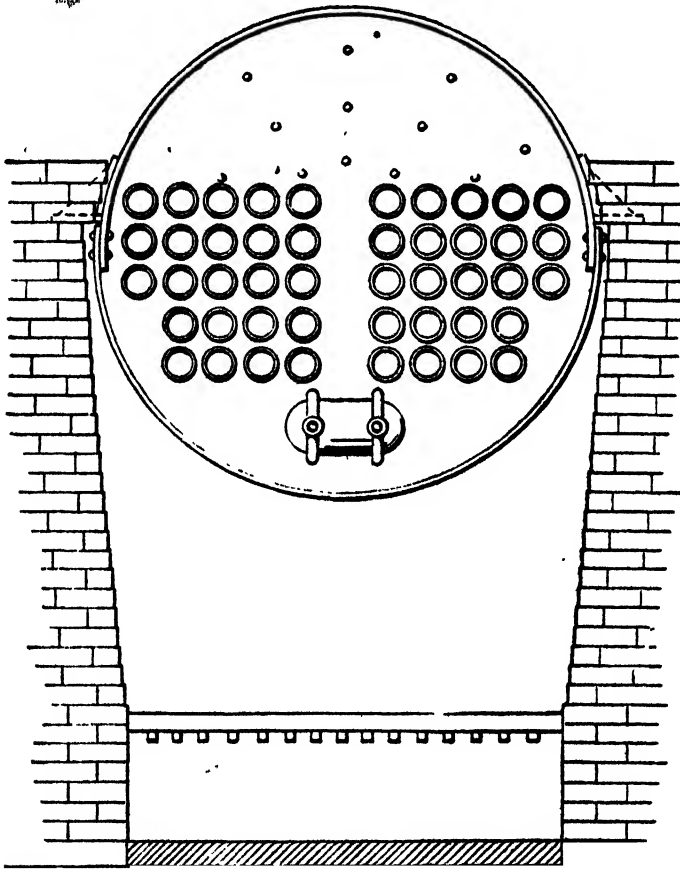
Seams of single-sheet boiler inaccessible and exposed to furnace heat.
